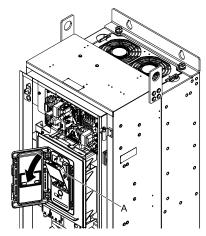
Open the IP55/UL Type 12 Keypad Cover Door
